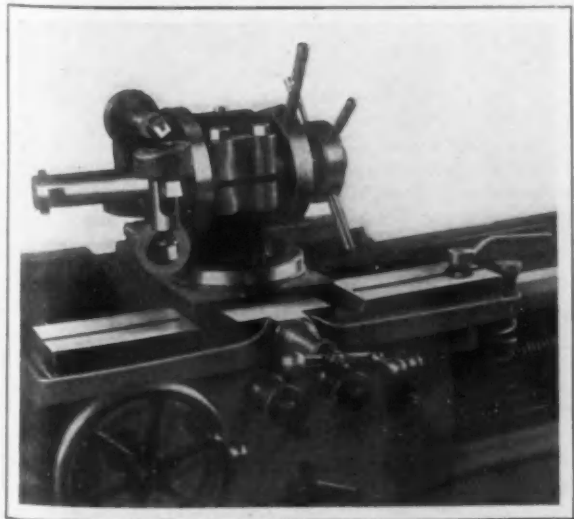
The Conradson Turret Tool Mounted in a Lathe
